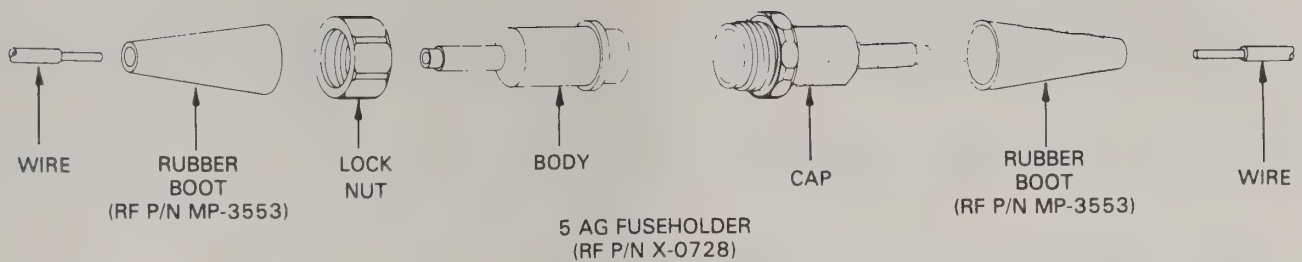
Transceiver Power In-line Fuseholder Assembly Diagram
